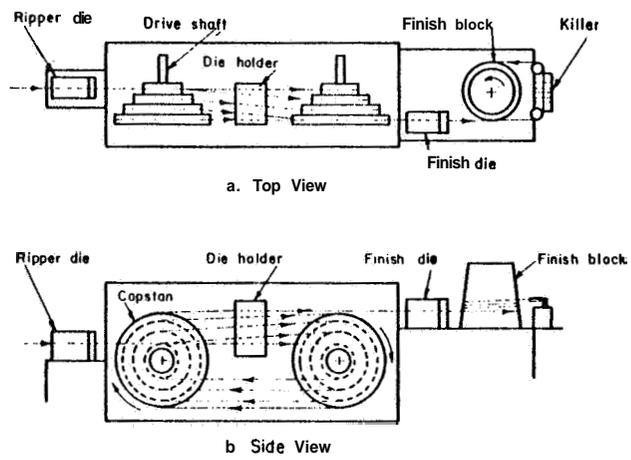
SCHEMATIC DRAWING OF WET-WIRE-DRAWING MACHINE (Ref. 53)
